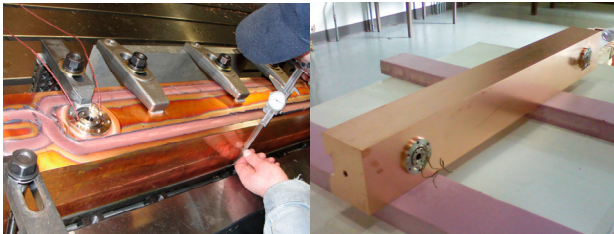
A proto-type 1m long Cu friction-stir-welded platen.
